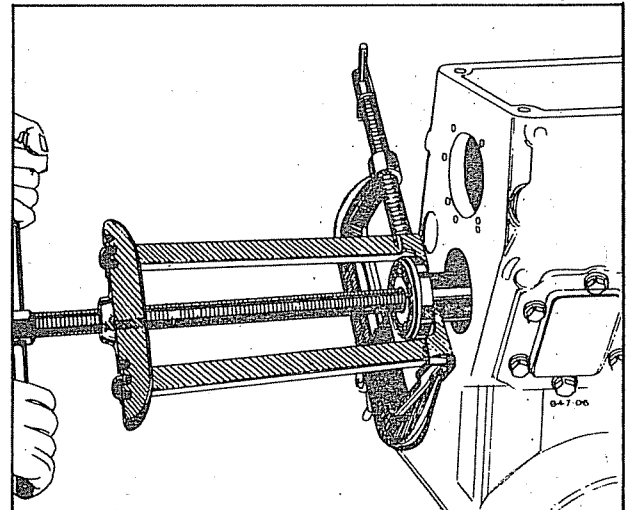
Removing Countershaft Rear Bearing, Tool C-549.
